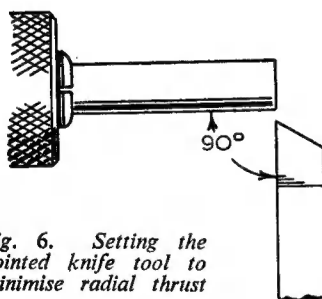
Setting the pointed knife tool to minimise radial thrust
